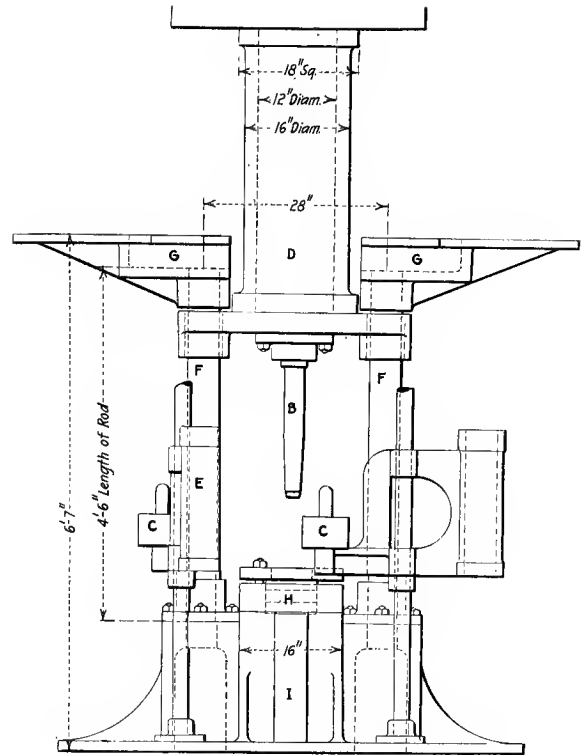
EQUIPMENT SHOWN FOR SECOND OR DRAWING OPERATION
